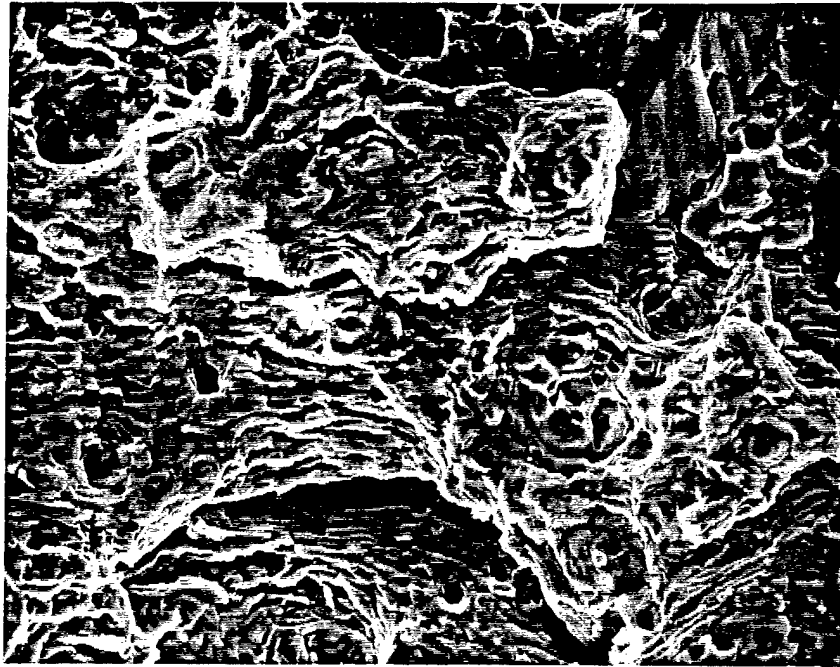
A Morphology Consisting of Striations, Tearing, and Ductility Observed on the Fracture Surface of PUR Rod -174 (Mag. 1kx).
